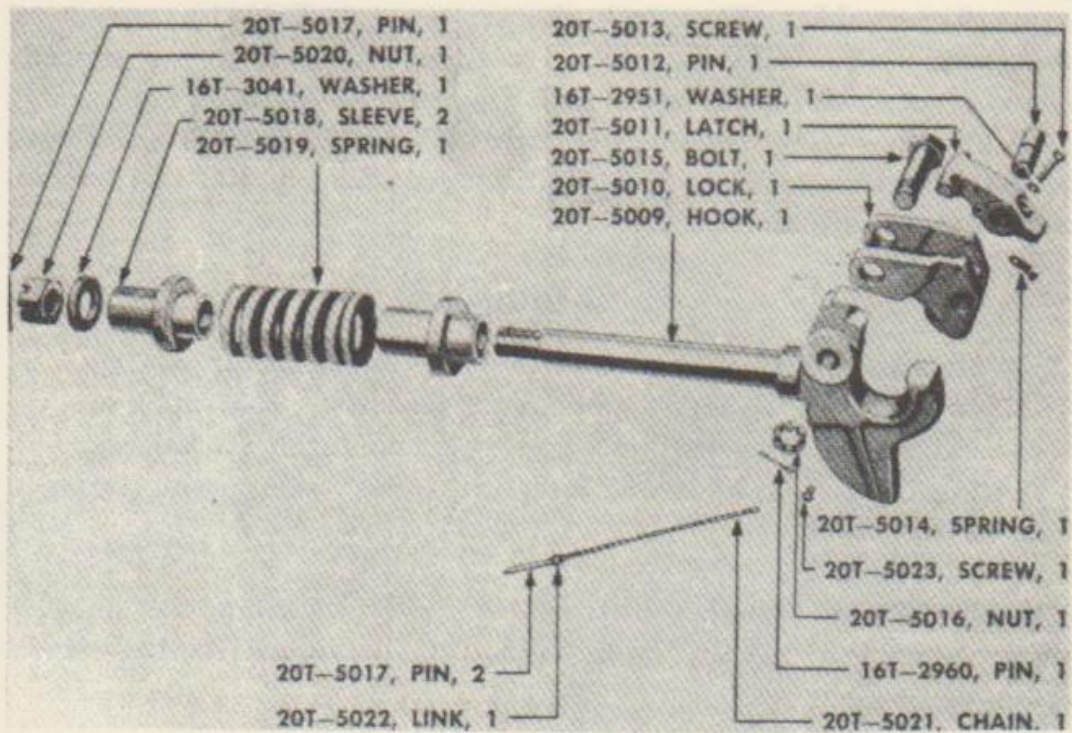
PINTLE HOOK—EXPLODED VIEW
